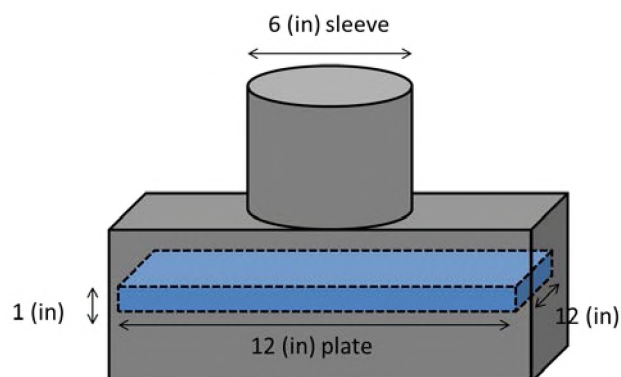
Schematic drawing of CES mold configuration used to cast the plate.
